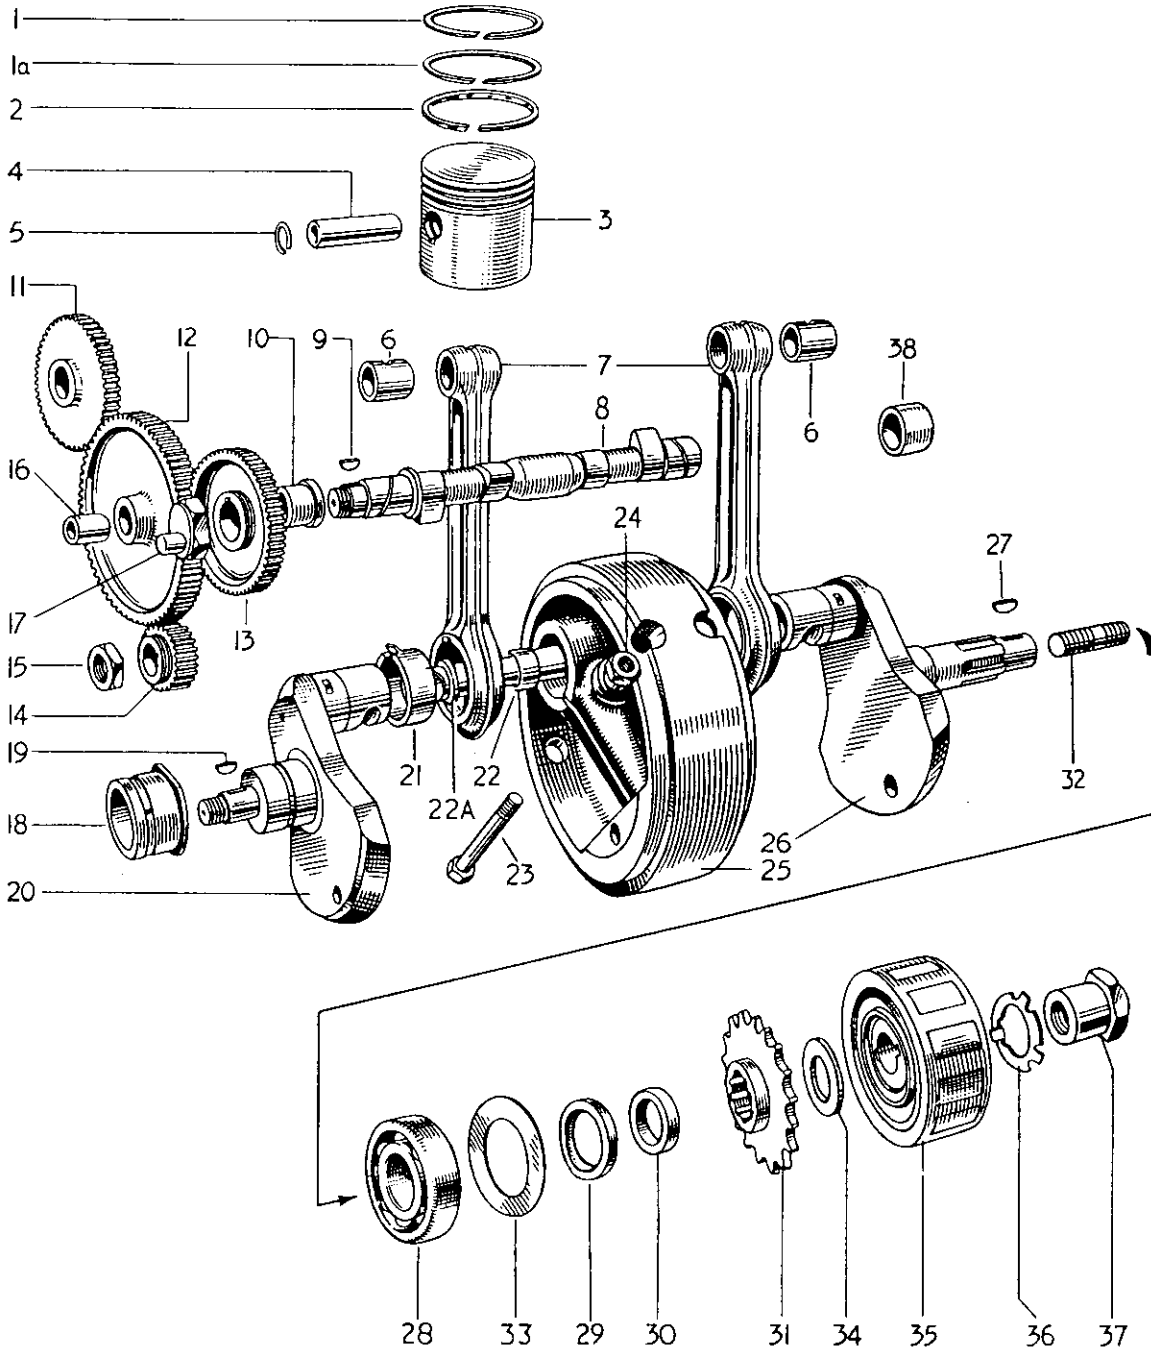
CRANKSHAFT ASSEMBLY, PISTONS AND TIMING GEARS.
